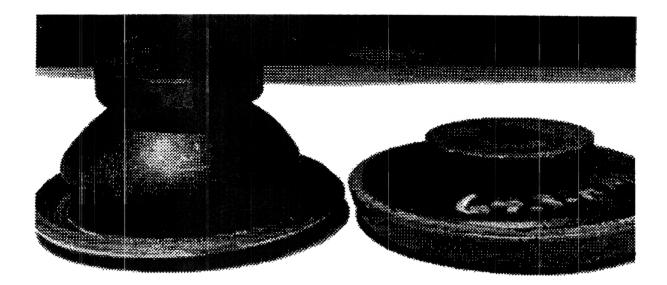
Cup and saucer bearing plate showing that the plate flattens out under high load.
